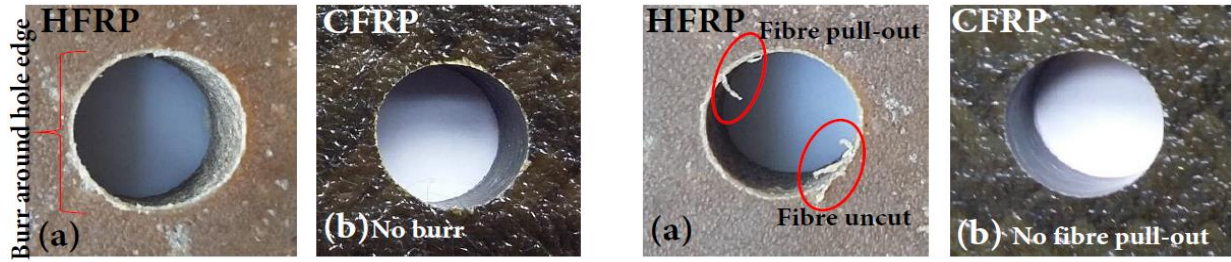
(a) HFRP sample with and (b) CFRP sample without burr formation and fibre pull-out/uncut at cutting speed of 20m/min.
